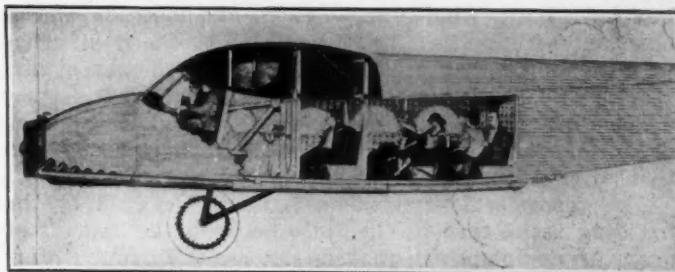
GENERAL ARRANGEMENT OF SEATING AND STRUCTURE
